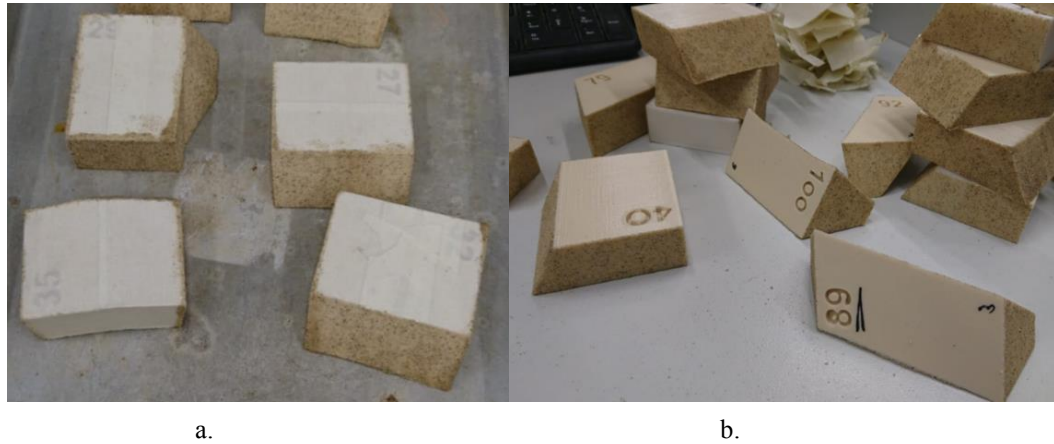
Final Coating of Block: a. Before the removal of paper tape; b. Final blocks.
